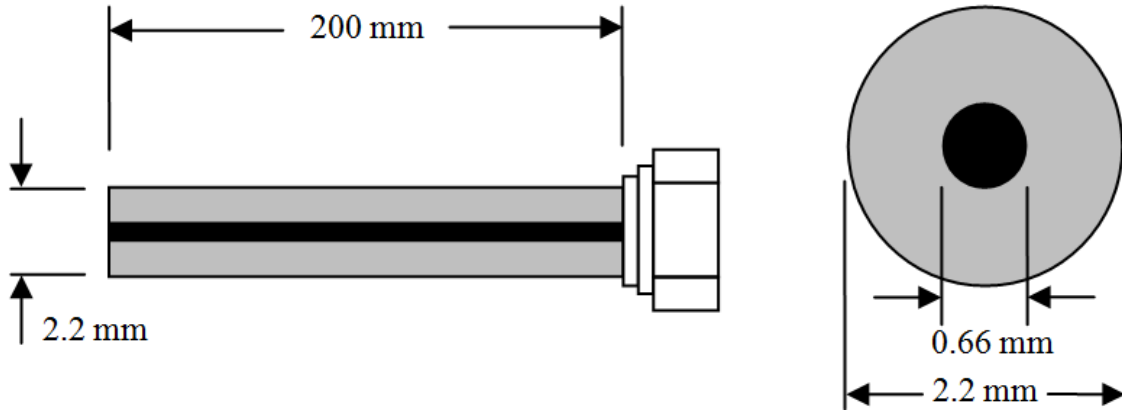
Dimensions of the Slim Form Probe used in measurements
